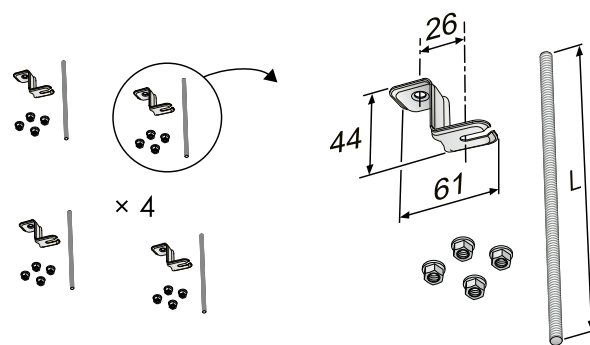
Assembly fitting SYST MS M8-1, ceiling mount and threaded rod
